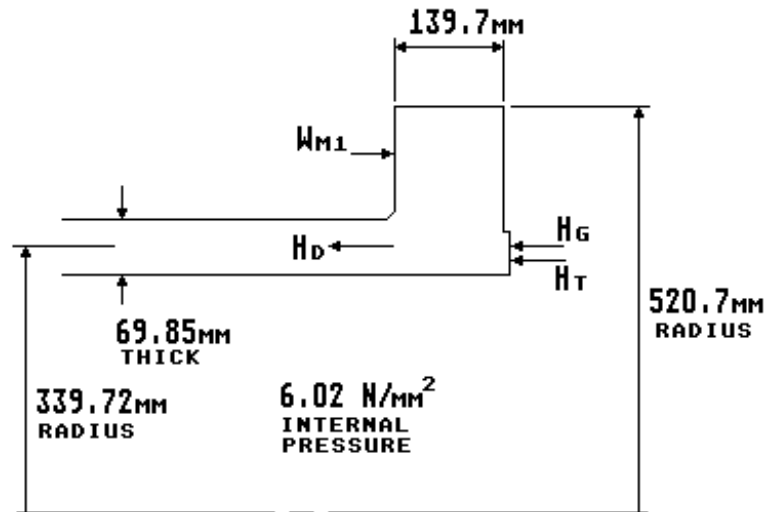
(a) 24 inch class 900 long weld neck flange
